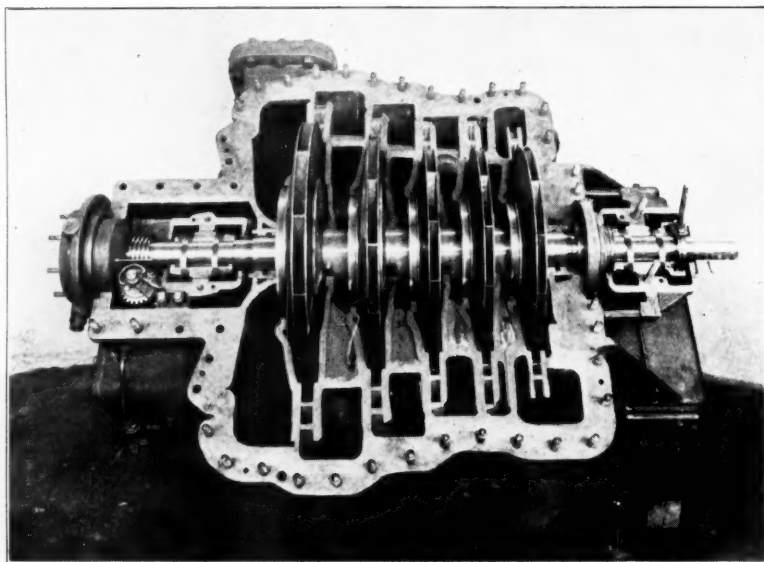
Showing lower half of a Carrier 5 stage centrifugal type compressor. At left note worm driven oil pump and ring oilers. At right note ring oilers and vacuum seal. The only contact of moving parts is at main shaft bearings.
